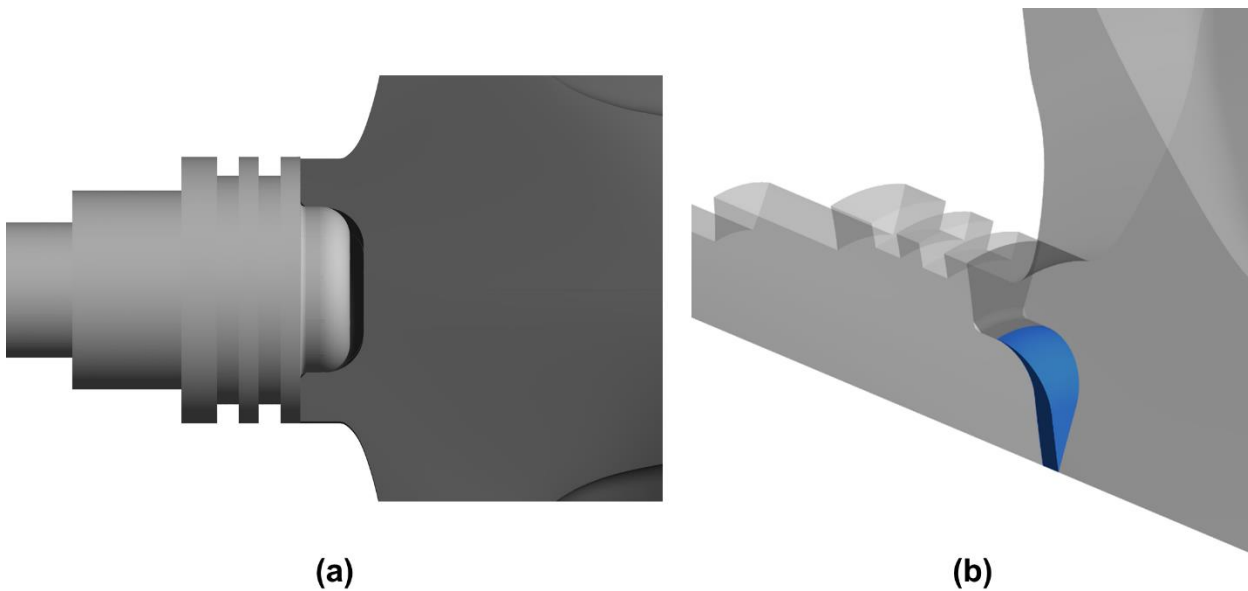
Detail view of (a) the shaft-rotor cavity and (b) the filler body within the cavity.
